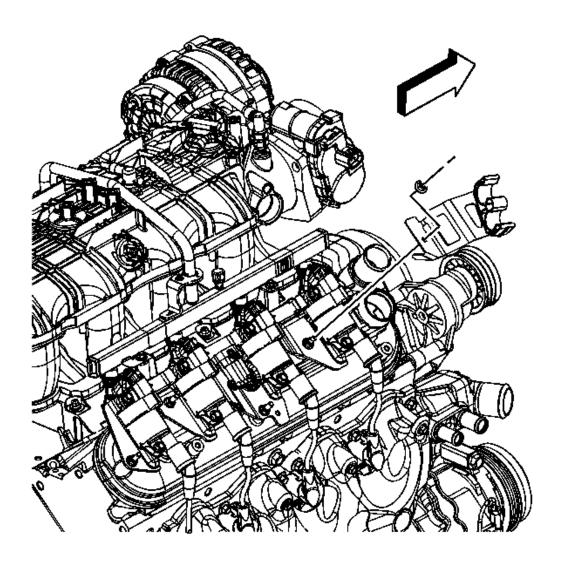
View Of Heater Hose Bracket & Nut Courtesy of GENERAL MOTORS CORP.
